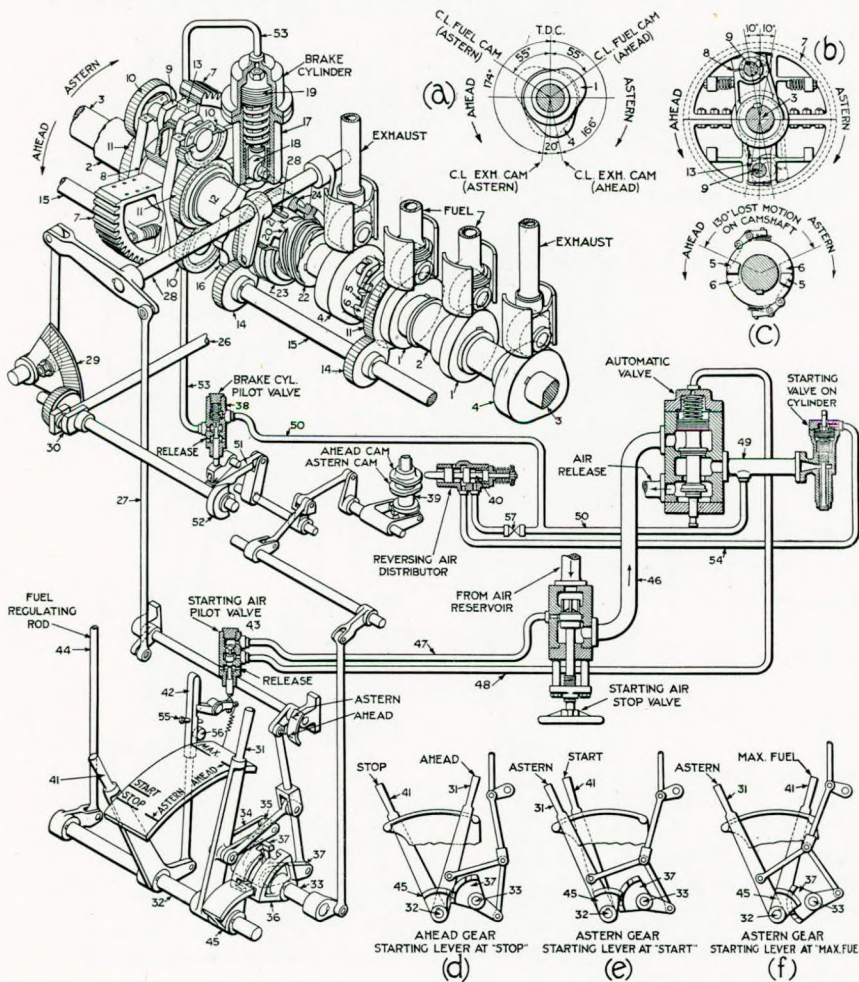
Reversing gear, single-acting two-cycle engine.
